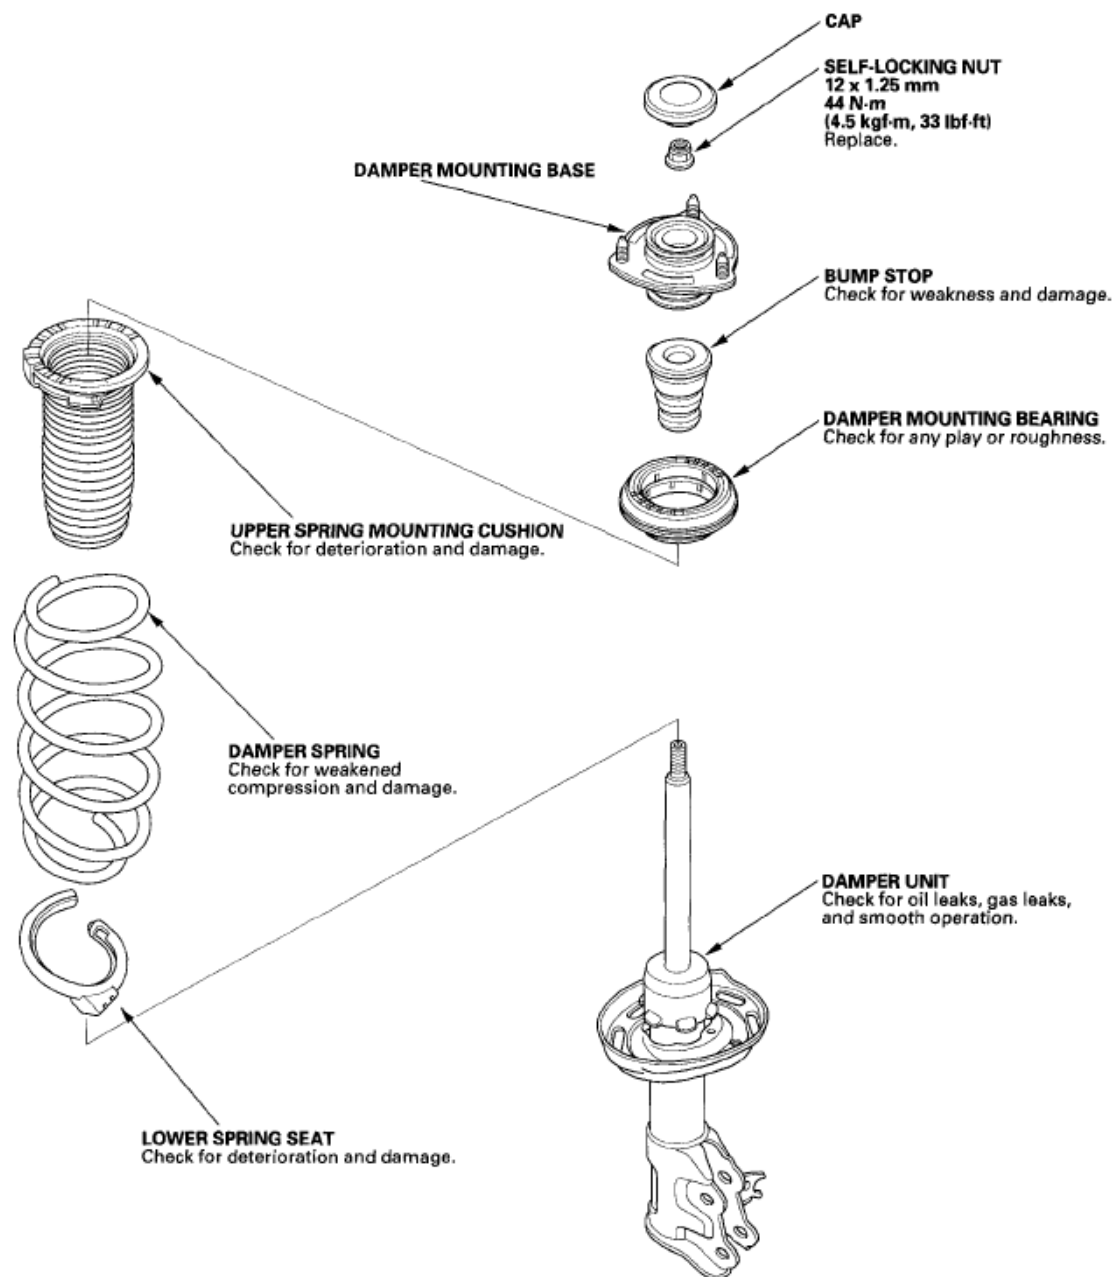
Exploded View Of Damper/Spring (With Torque Specifications)
